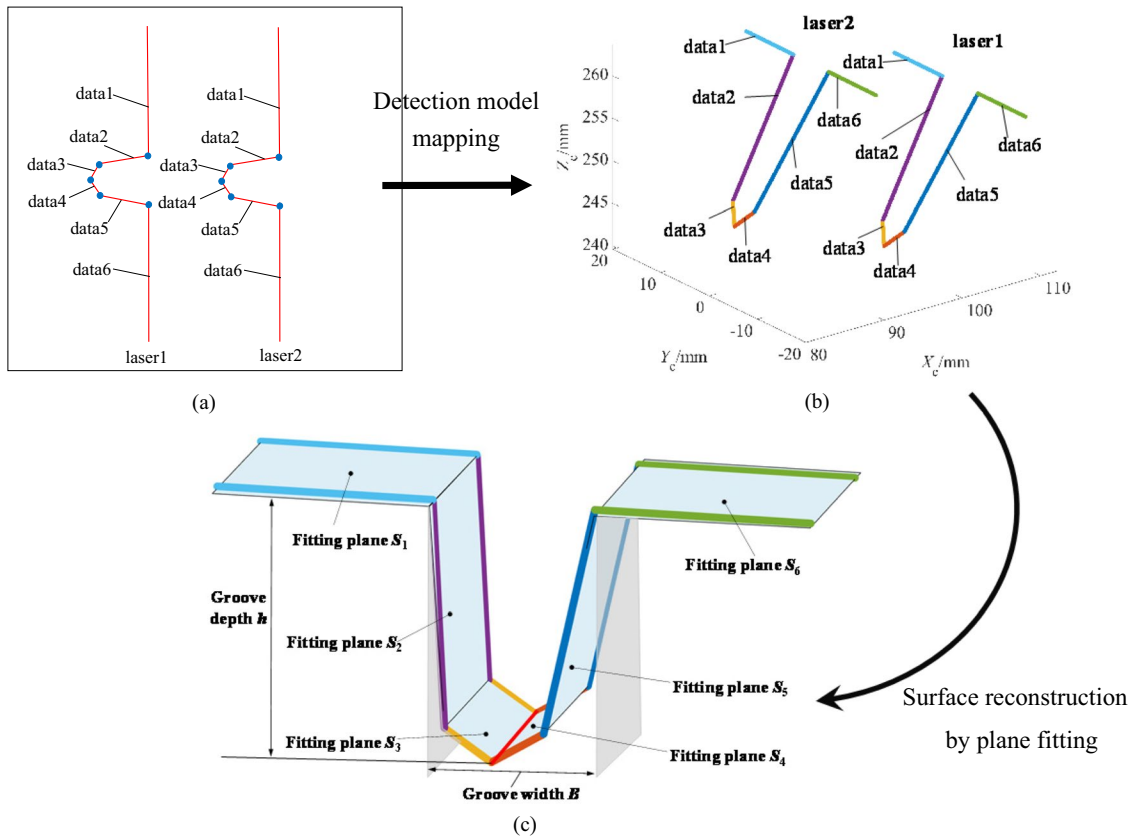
The process of solving welding groove parameters based on plane fitting: (a) Data segmentation of fitting laser centerline; (b) 3D segmented data of laser lines; (c) Reconstruction of welding groove surfaces based on plane fitting
